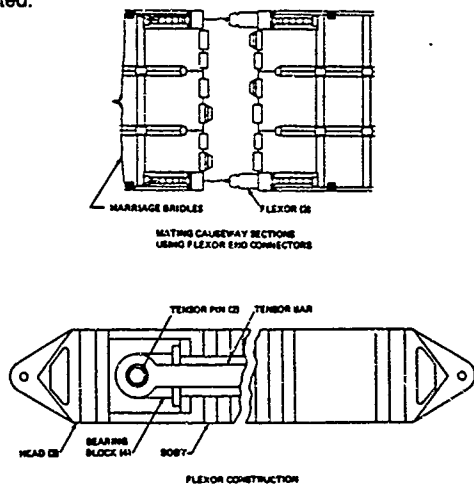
Flexor Pin Construction and Causeway End Connection
